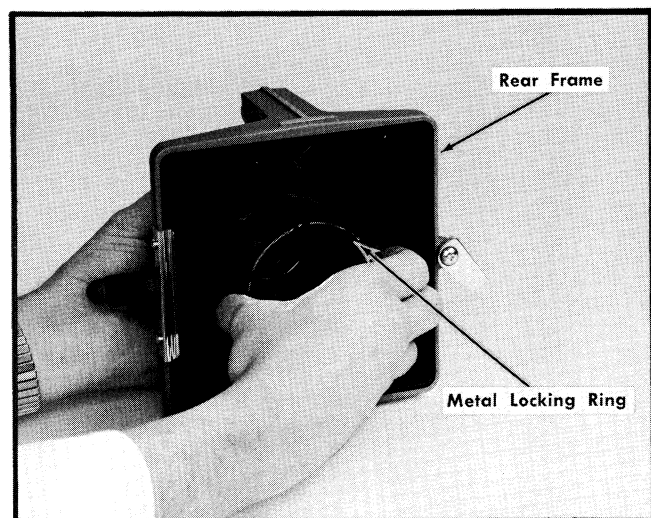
Removing the metal locking ring from an Elgeet Lens.
